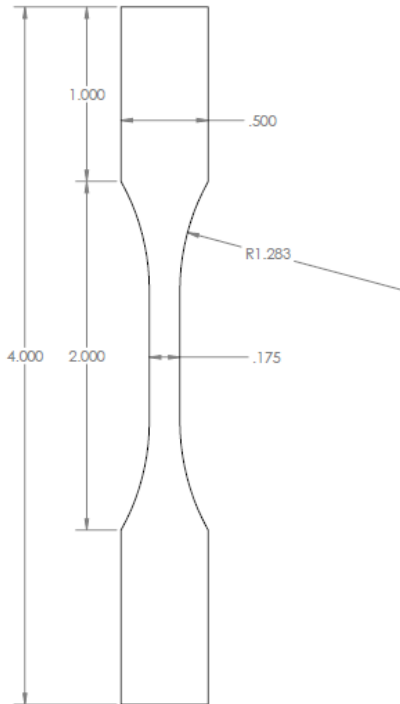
As-machined cylindrical geometries used for fatigue testing, dimensions in inches. Dimensions supplied by AFRL.
